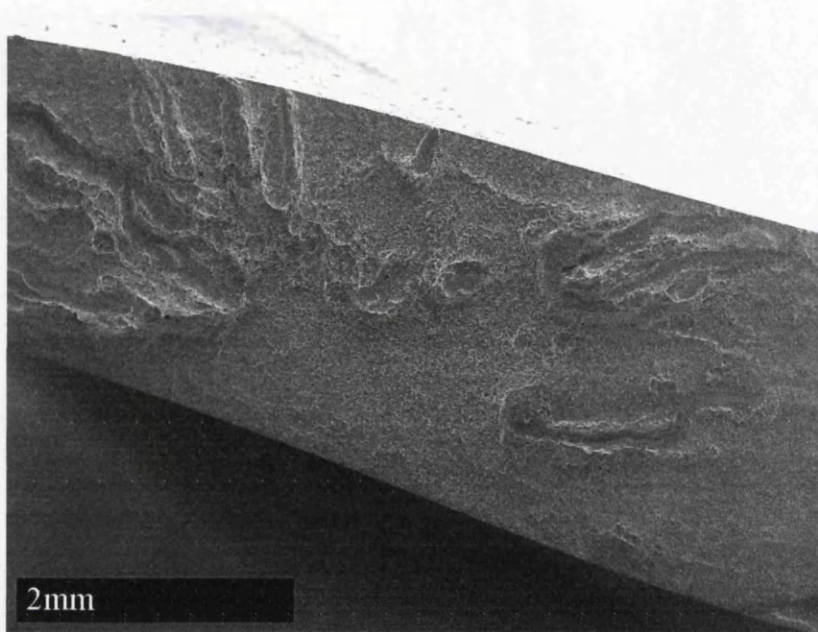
The fracture surface of the Microbraz brazed fusion weld (plan view).
